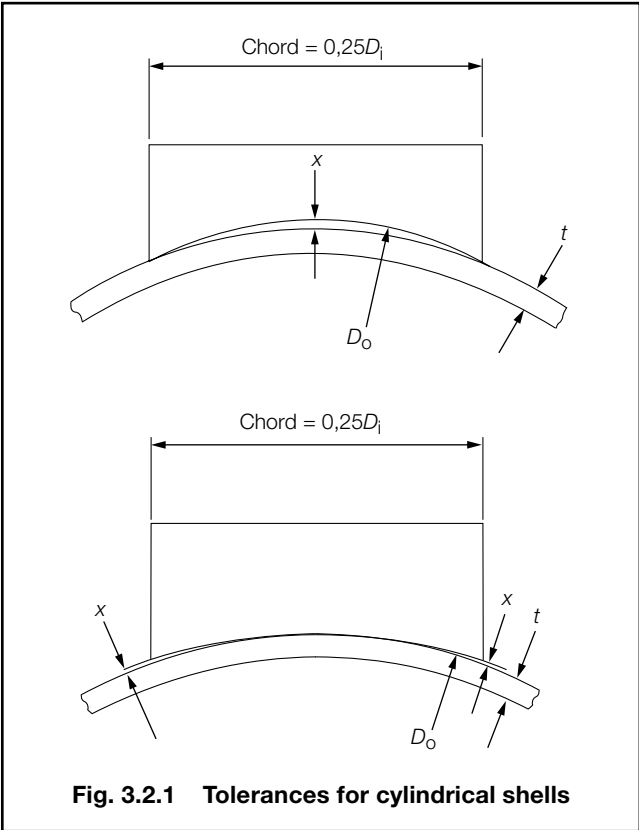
Tolerances for cylindrical shells
